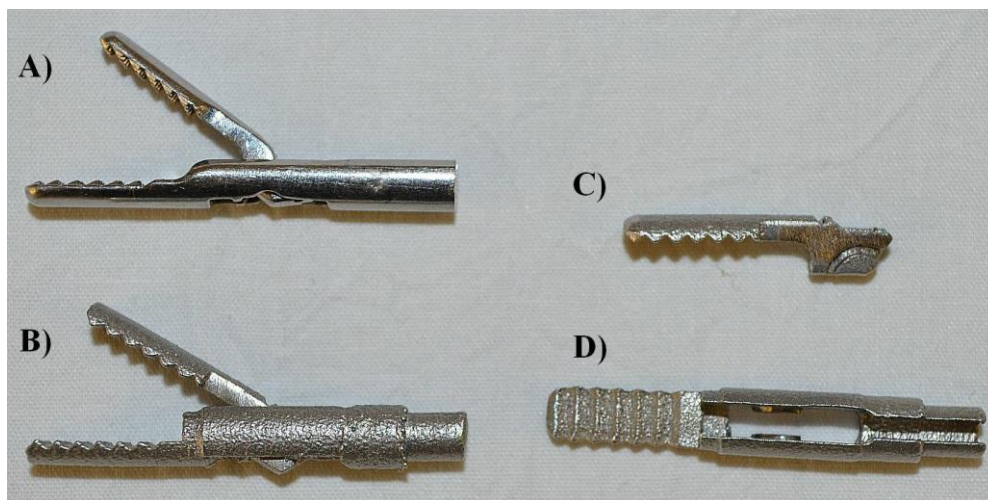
Grasper jaws (a) ACUFEX jaws; (b) sintered jaws; (c) top jaw; (d) bottom jaw.
